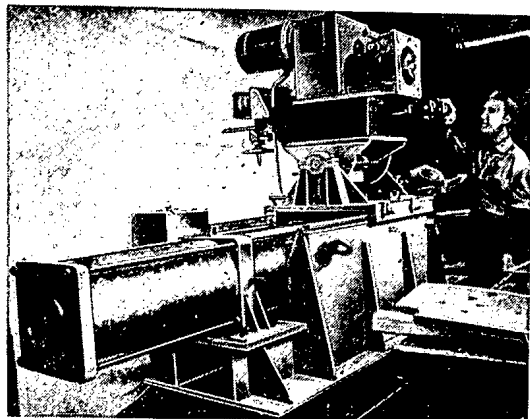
Cutting device for the processing of the outside welding seams in shells.
